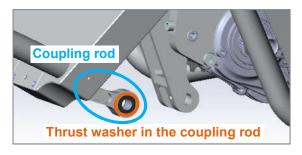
Coupling rod with thrust washers taken out of the deflector of the swing arm
